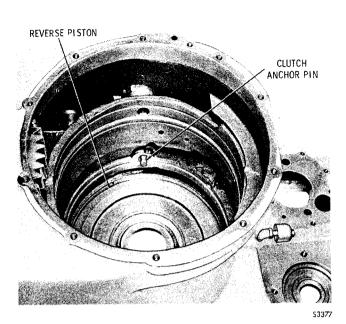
Reverse clutch piston and clutch anchor pin
